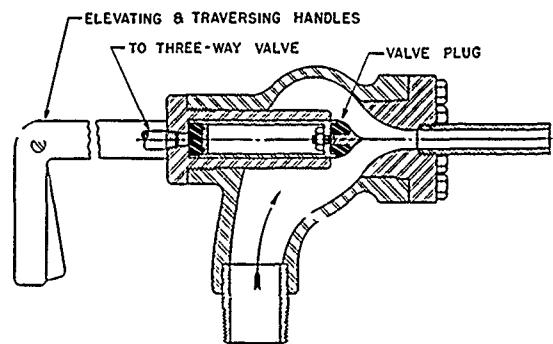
Model I-3 flame-thrower nozzle showing pintle valve in open position.
